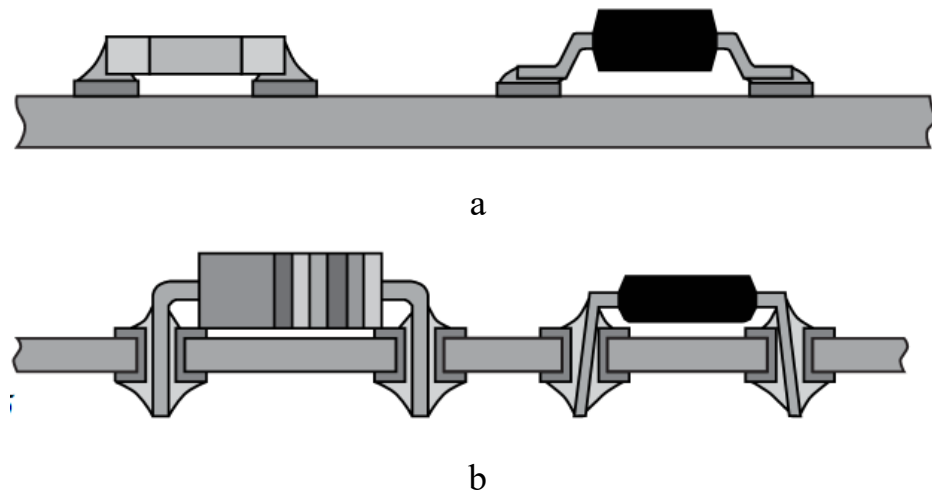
Schemes of installation and assembly of components and printed circuit boards: a - surface mounting; b - installation of pins in the holes
